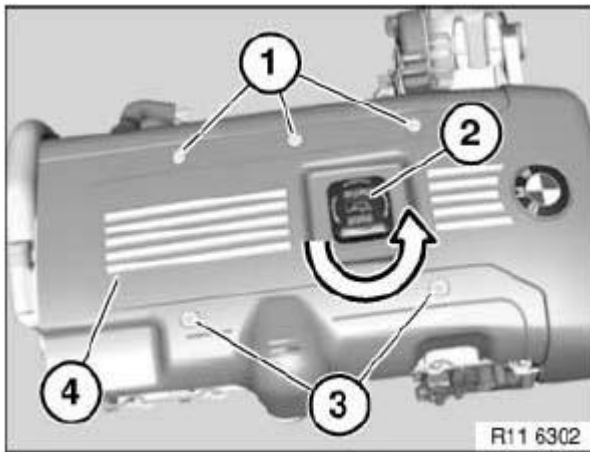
Identifying Oil Cap, Acoustic Cover And Retaining Screws
